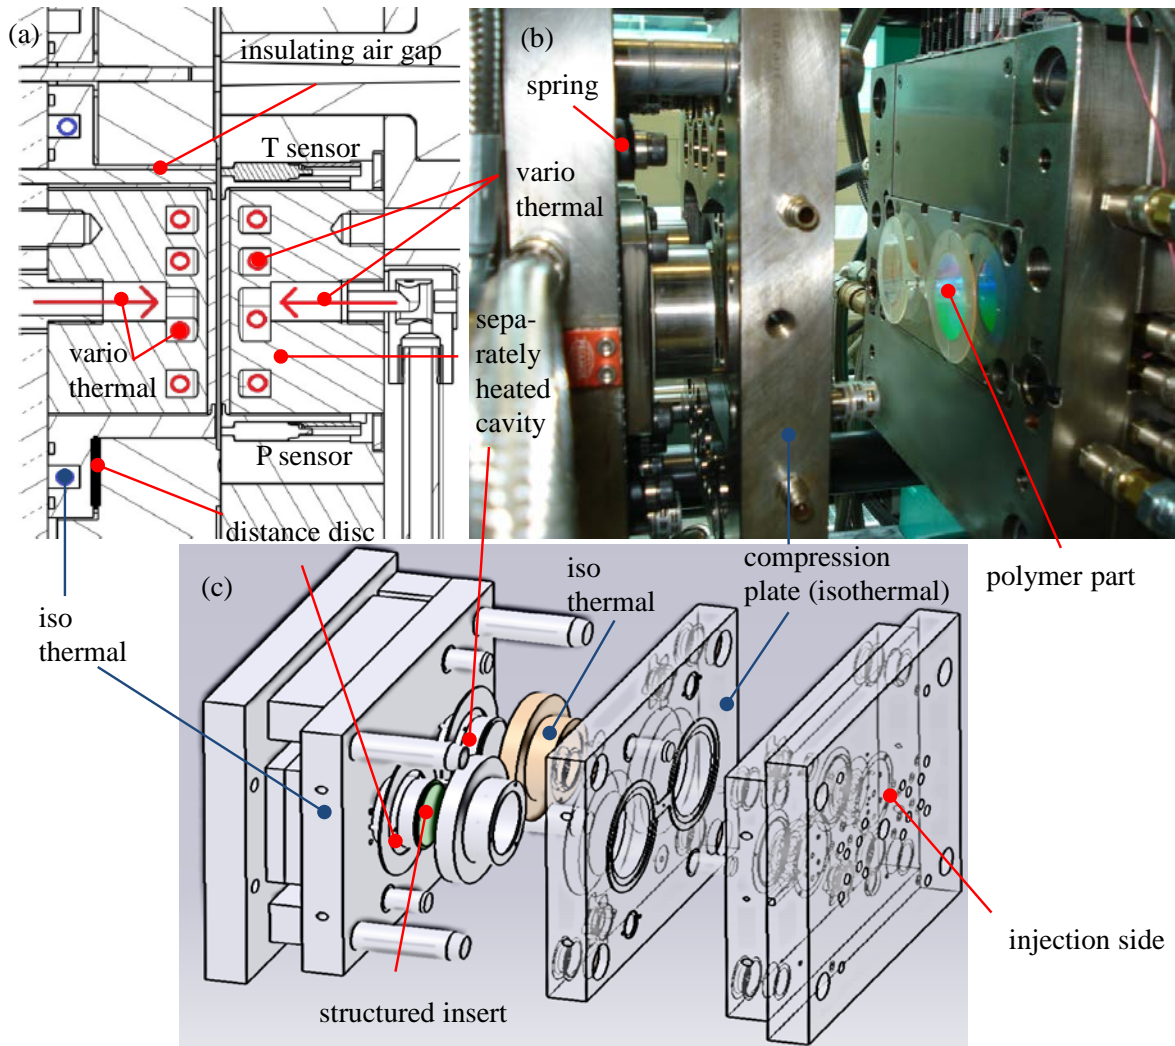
(a) CAD cross-section of the dynamic heated cavities with T and P sensors; (b) photograph of injection compression mould with replicated polymer part on injection side; (c) 3D CAD drawing of the injection mould.
